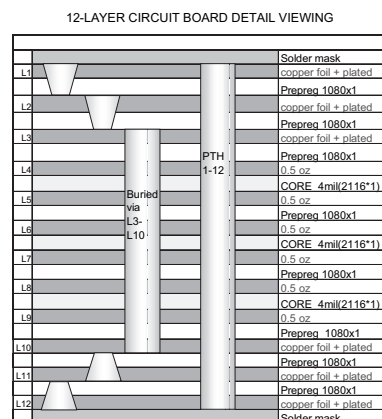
12-Layer Circuit Board Detail Viewing
